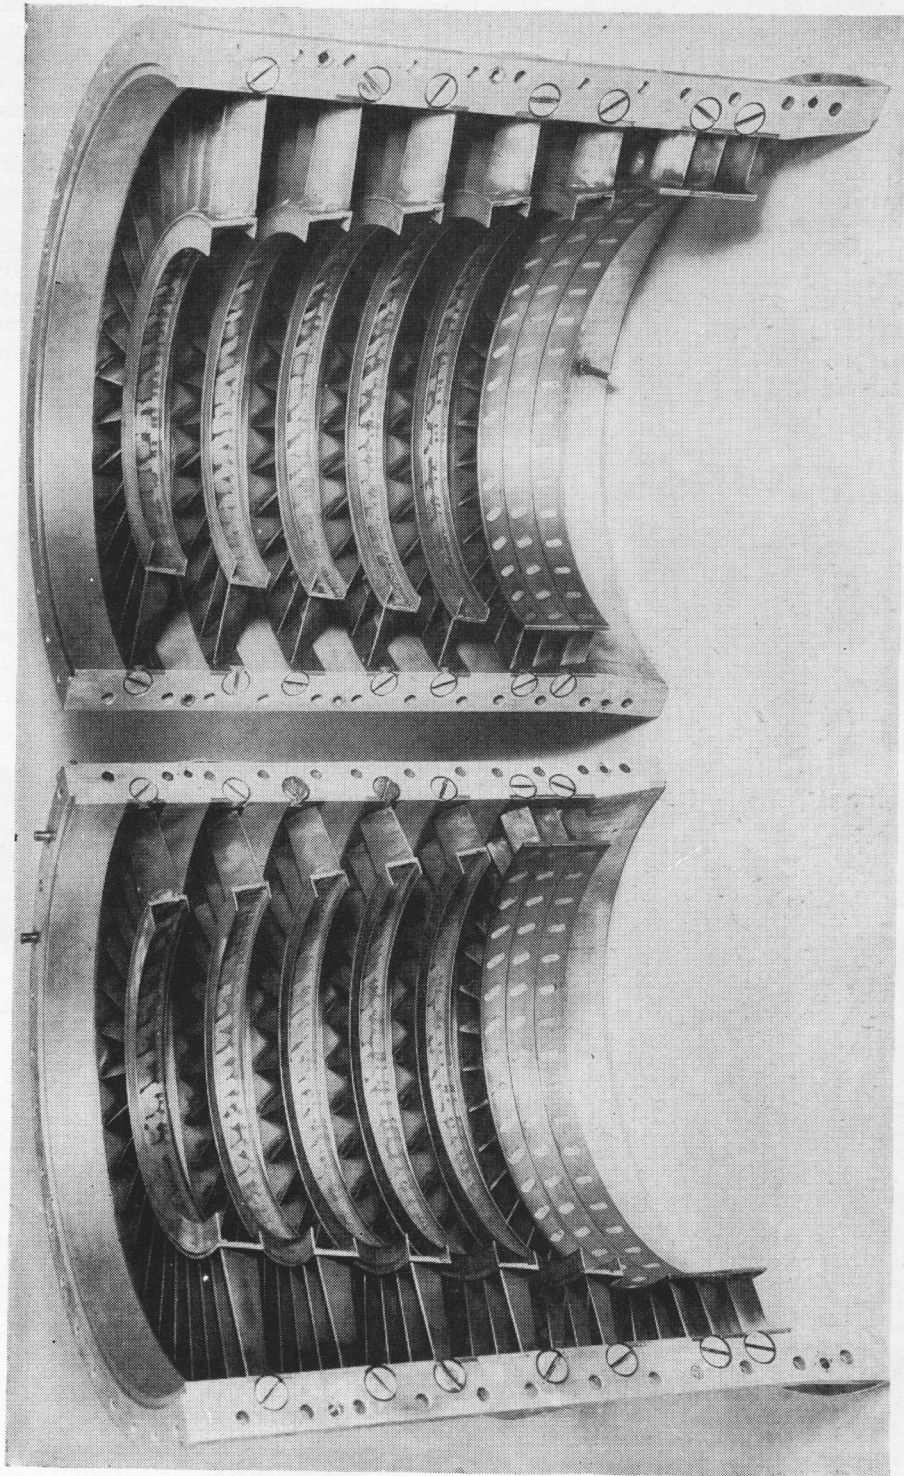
Top and bottom halves of the Yankee compressor casing with stator blades installed. Both the inner and the outer stator shroud rings are of stainless steel, with blades welded in place in slots. The sealing rings are welded to the shroud rings.
